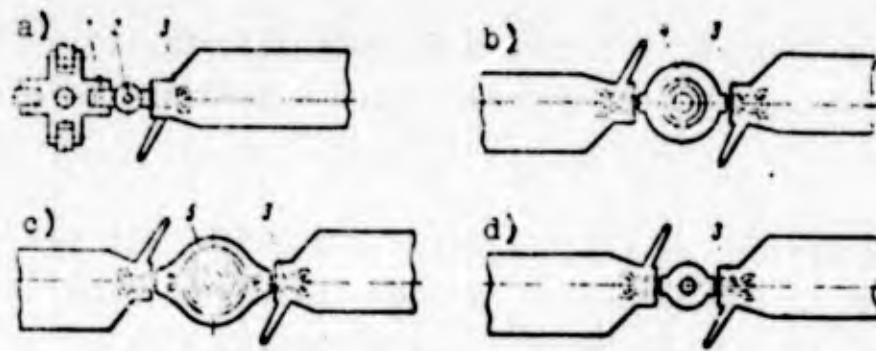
Types of rotors a) with hinged suspension of blades; b) with general drag hinge; c) on a universal joint; d) with rigid attachment of the blades: 1 - flap-
